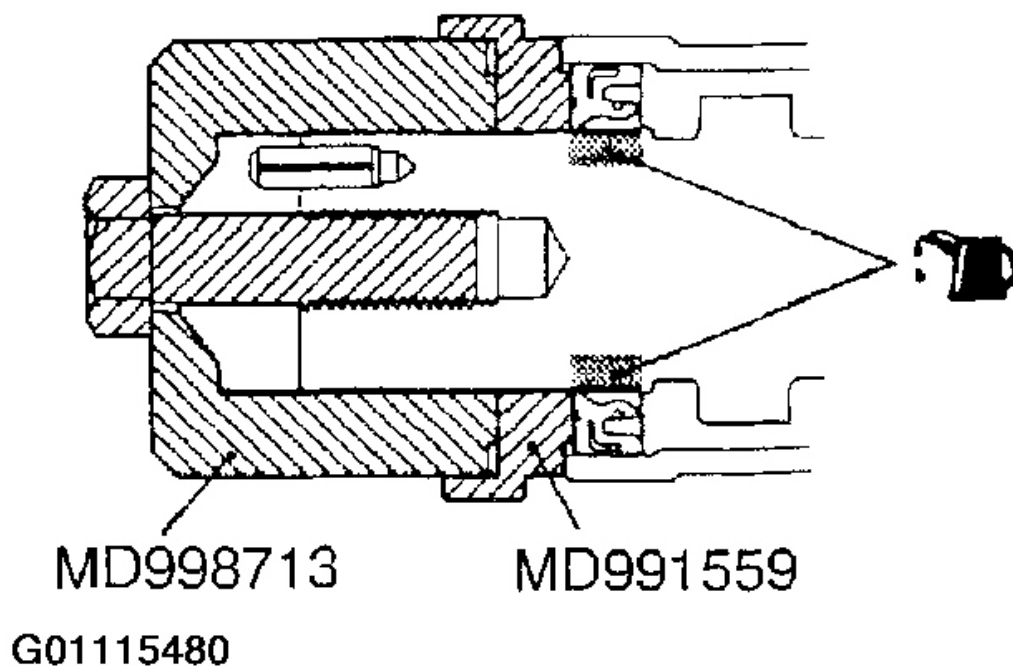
Installing Camshaft Oil Seal (Front Bank)
